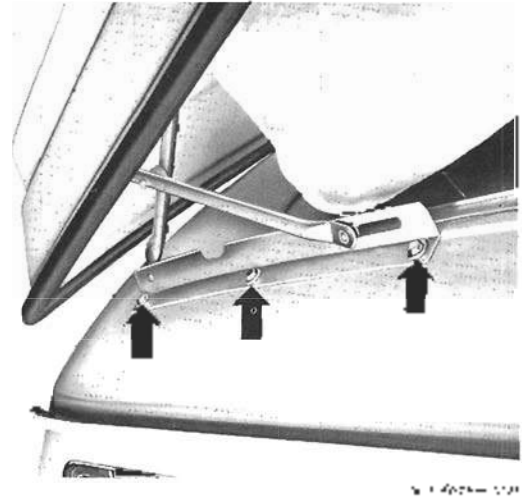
Bolts (arrows) that hold hinge on roof panel. Be careful not to let the unbolted hinge scratch the paint on the roof panel.
